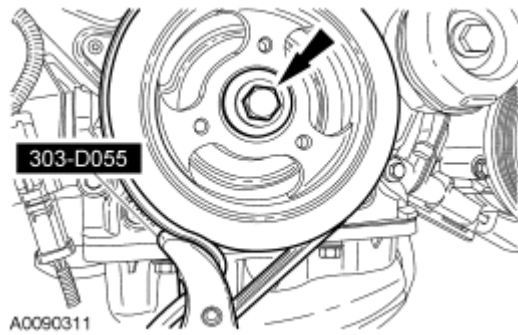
Identifying Special Tool (303-D055) And Crankshaft Pulley Bolts
